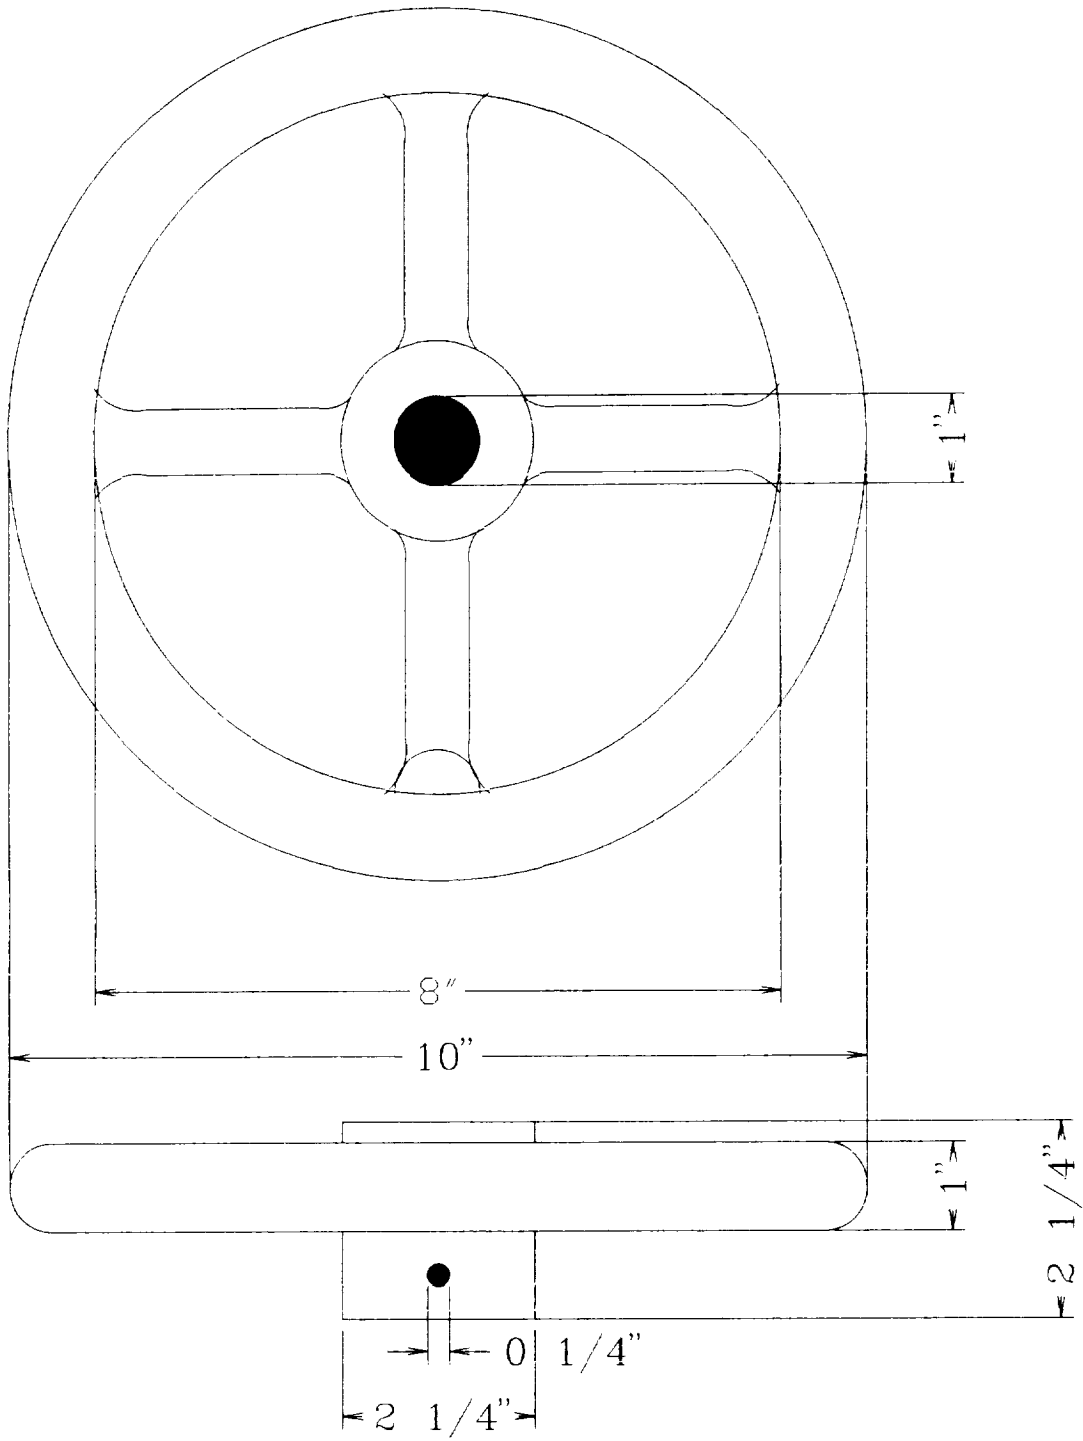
Hand wheel with through holes for Acme rod and roll pin.
